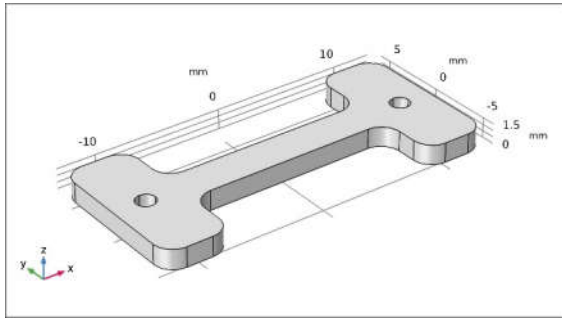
Geometry of bone shaped sample. The dimensions are 21 mm of gage section and 21×1.5 mm² of rectangular cross section
